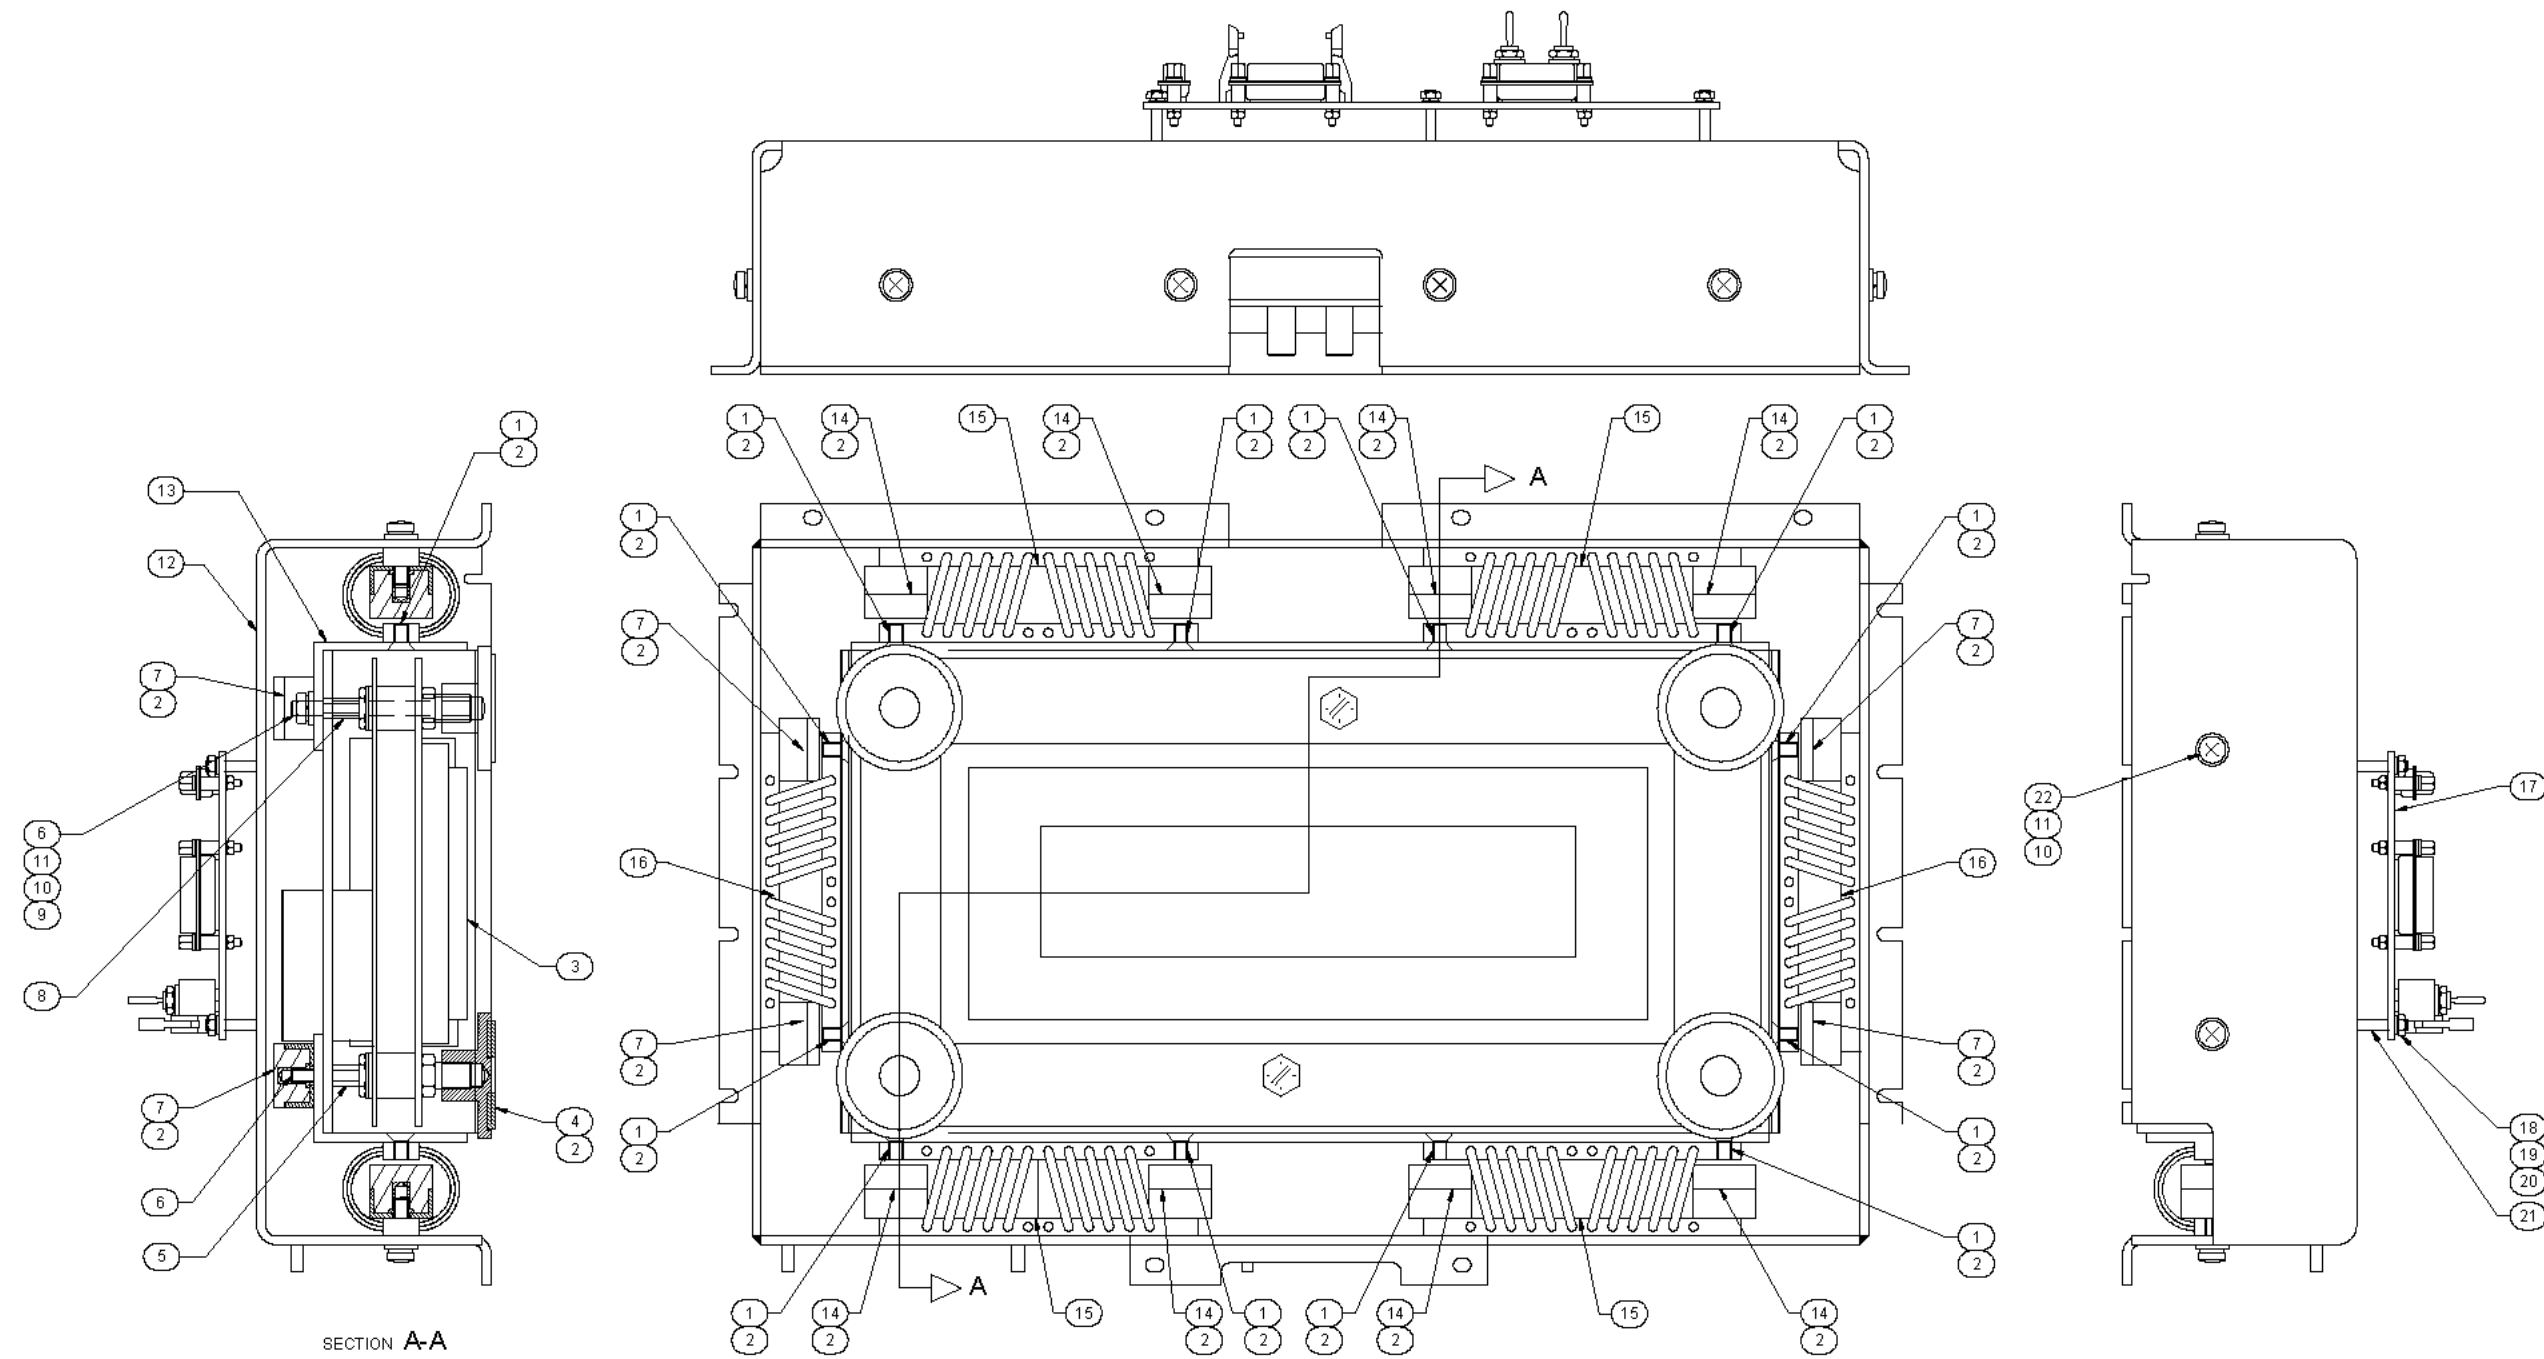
Front Panel: Display Assembly (1A1A10)
